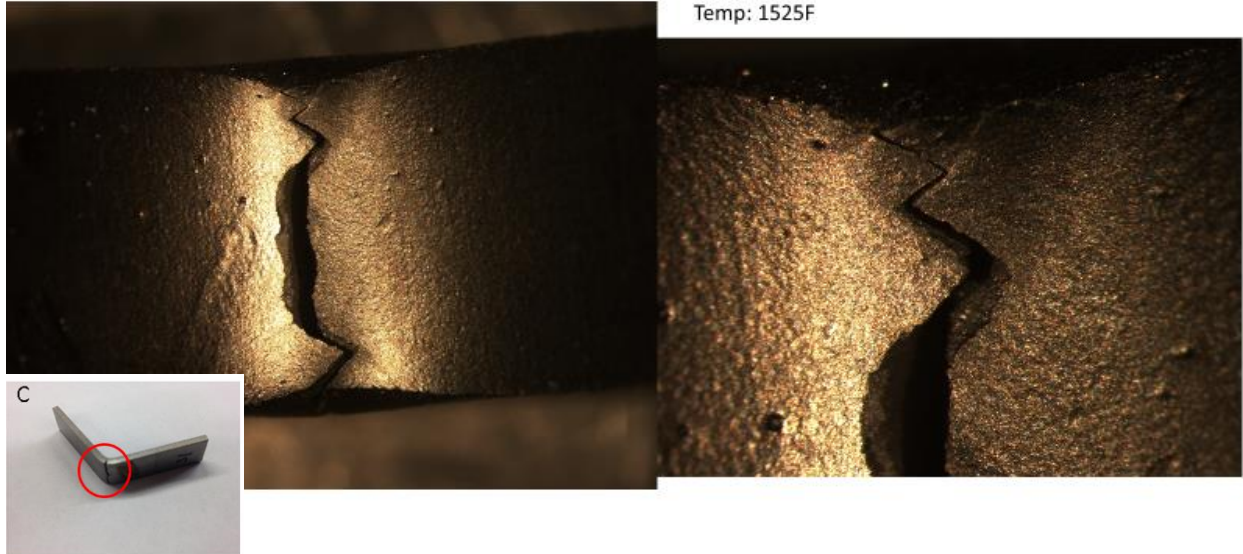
This complete fracture specimen has cracking going all the way through the material and significant shear lips at the edges.
